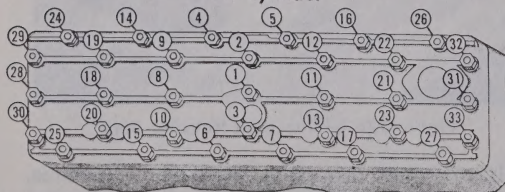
Cylinder Head Tightening Sequence — Six Cylinder
